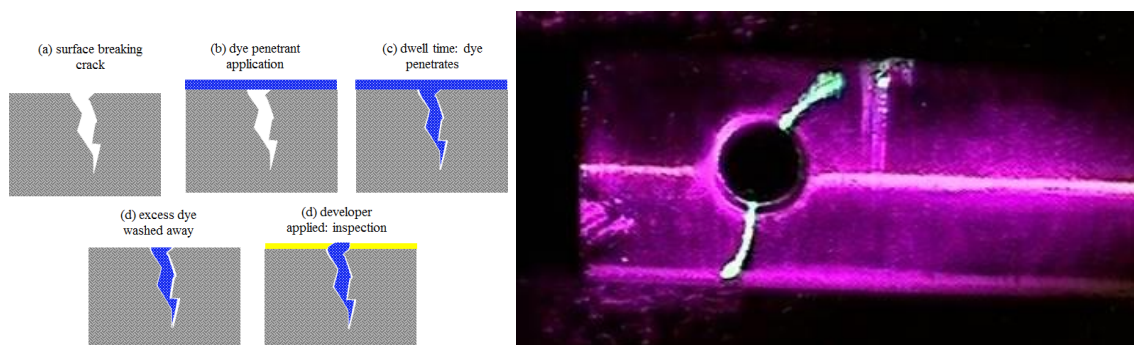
illustration of dye penetrant inspection principles (left), with image of a cracked part under UV-light inspection (right) [51] courtesy of the NDT Education Resource Center, Iowa State University, USA.
